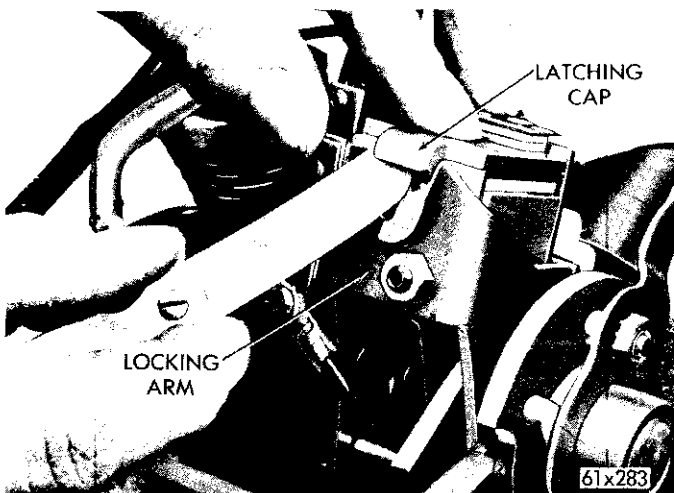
Measuring the Clearance between the Locking Arm and Latching Cap
